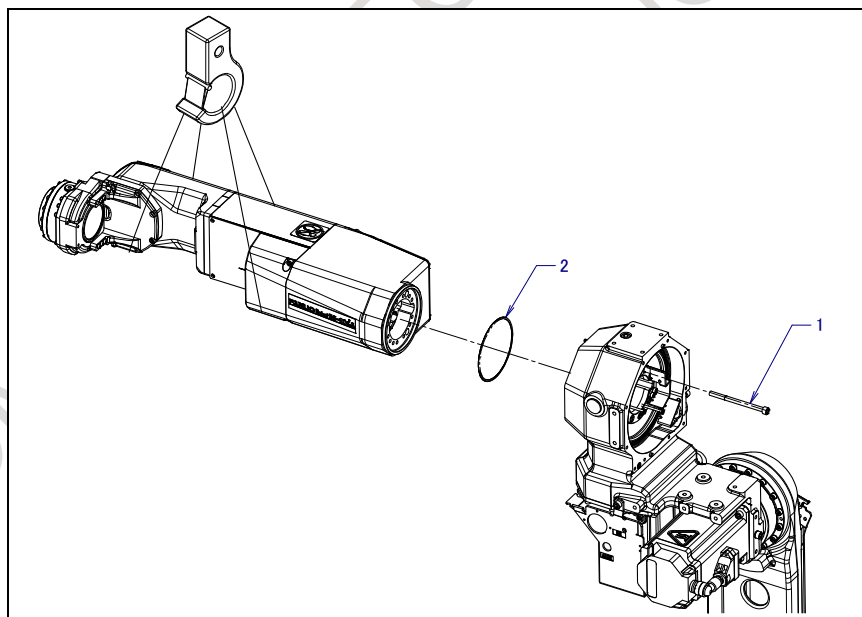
(a) Replacing the J4-axis gearbox unit (1/4)
